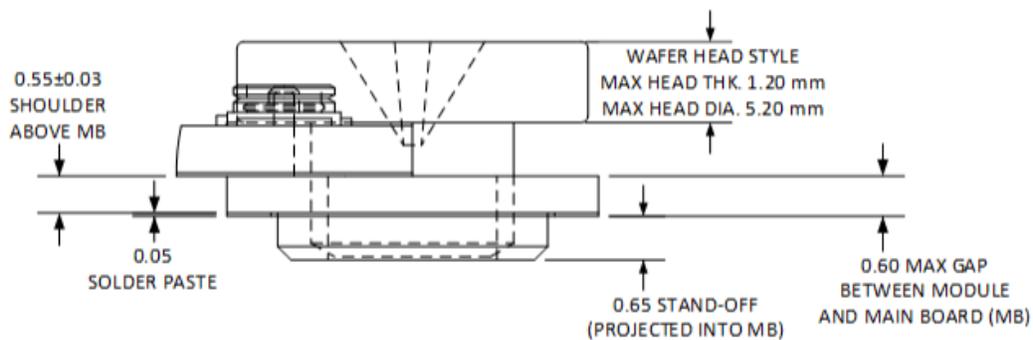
Elevated Single-sided Top Mount Solder Stand-off
